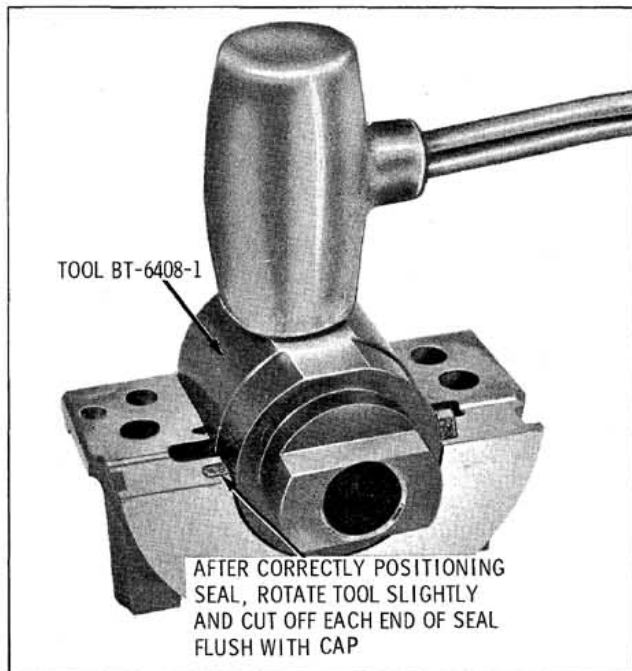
Installing Rear Main Oil Seal Lower Half - 330 Cubic Inch
